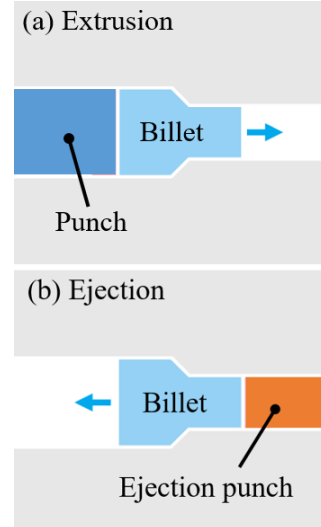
Schematic view of the forward extrusion process. Extrusion and ejection steps.
